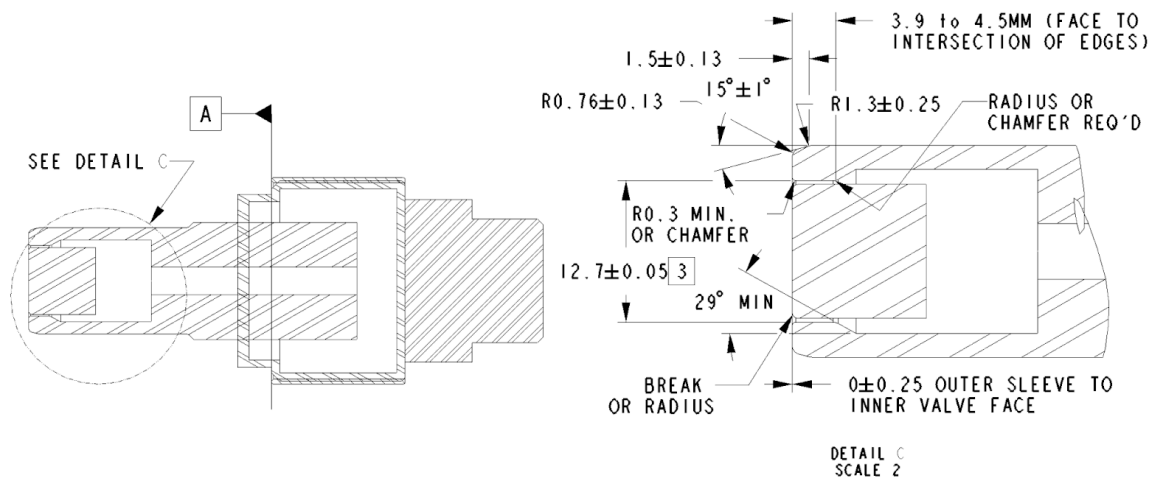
X-Section Side & Detailed View of Plug Valve
